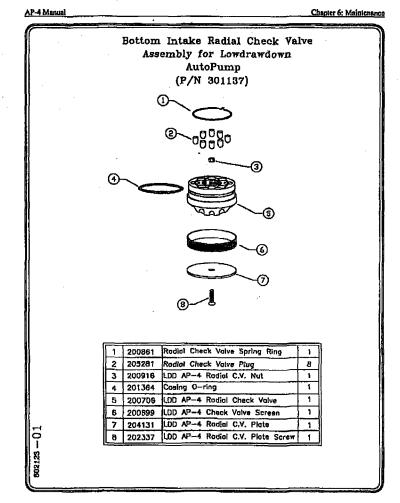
Exploded View of Bottom Intake Radial Check Valve for Low-Drawdown Pump
